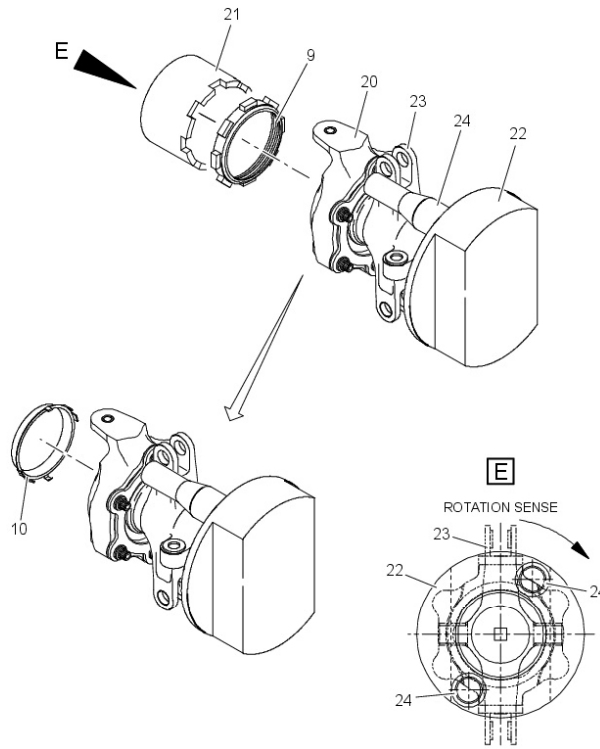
(sheet 3 of 5). Housing and slider group - Assemble procedure (Sleeve assy P/N 109G6430A03)
